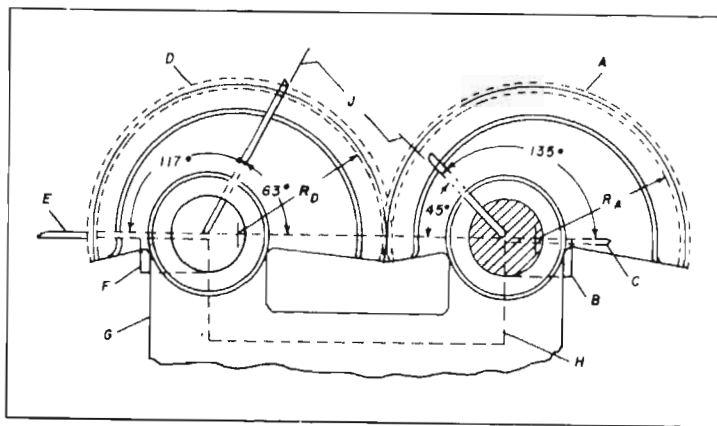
Eccentric gears arranged to facilitate folding of foil on a form in a bagmaking machine. Interference between the folds is prevented.
